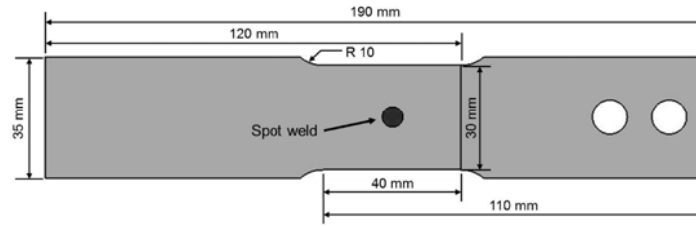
Specimen shape for the failure test of a spot weld under pure-shear loading condition.
